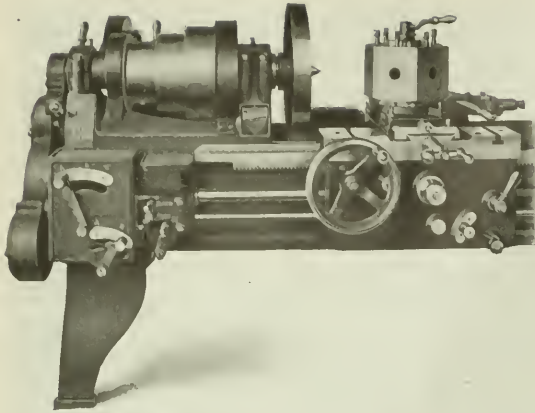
"Roulsted" Engine Lathe equipped with Turret Toolpost
